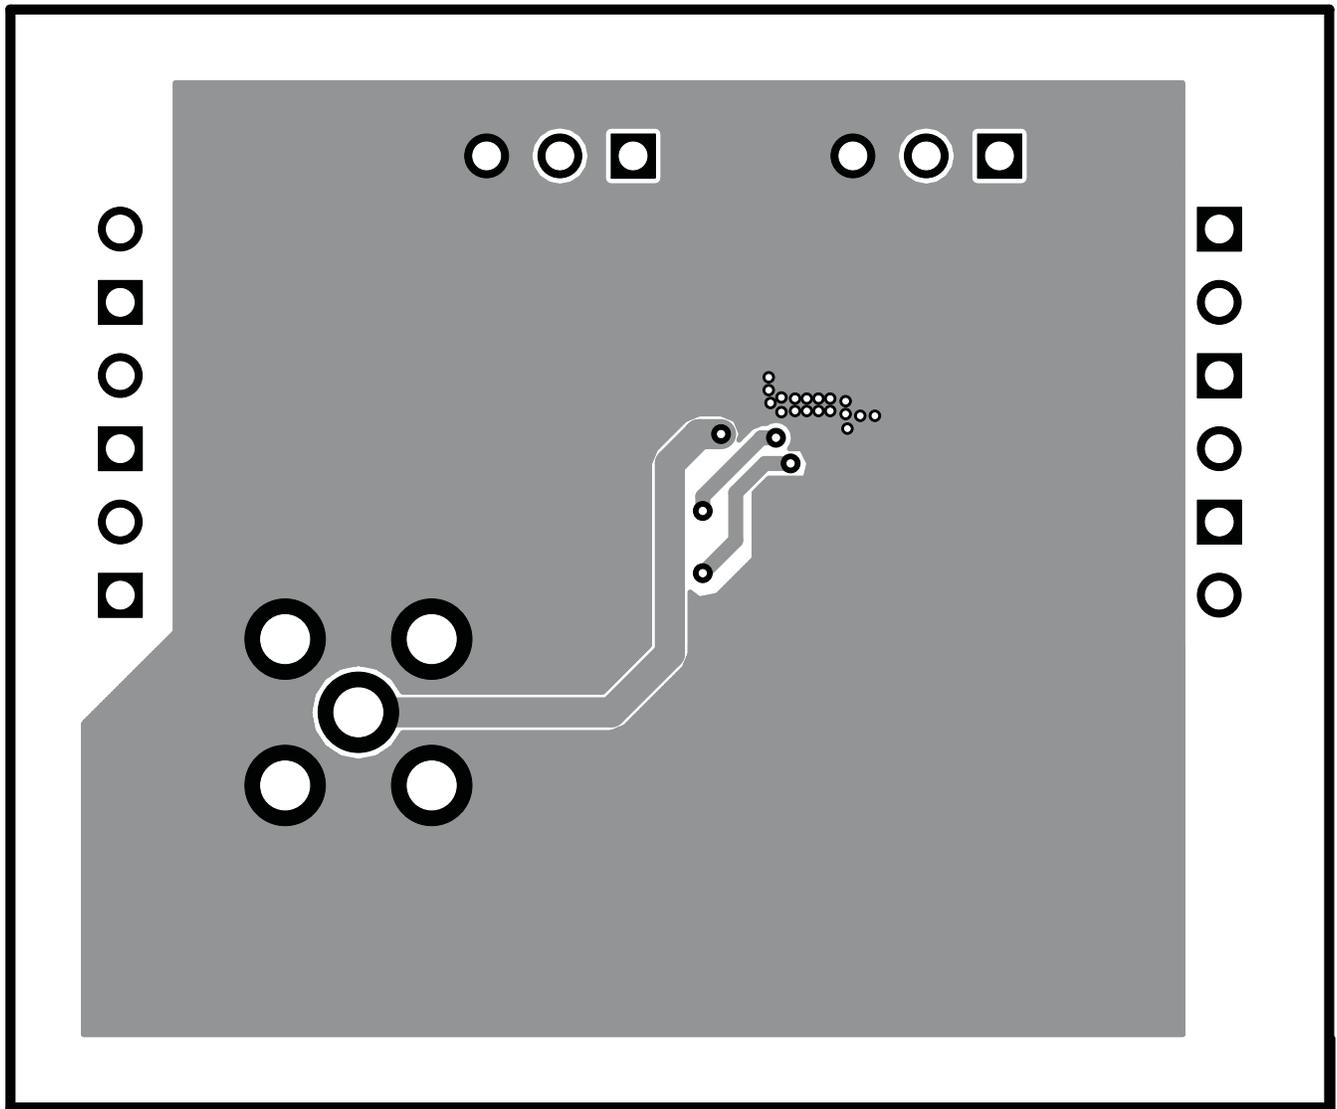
TLV62065EVM Bottom-Side Copper, Bottom View
